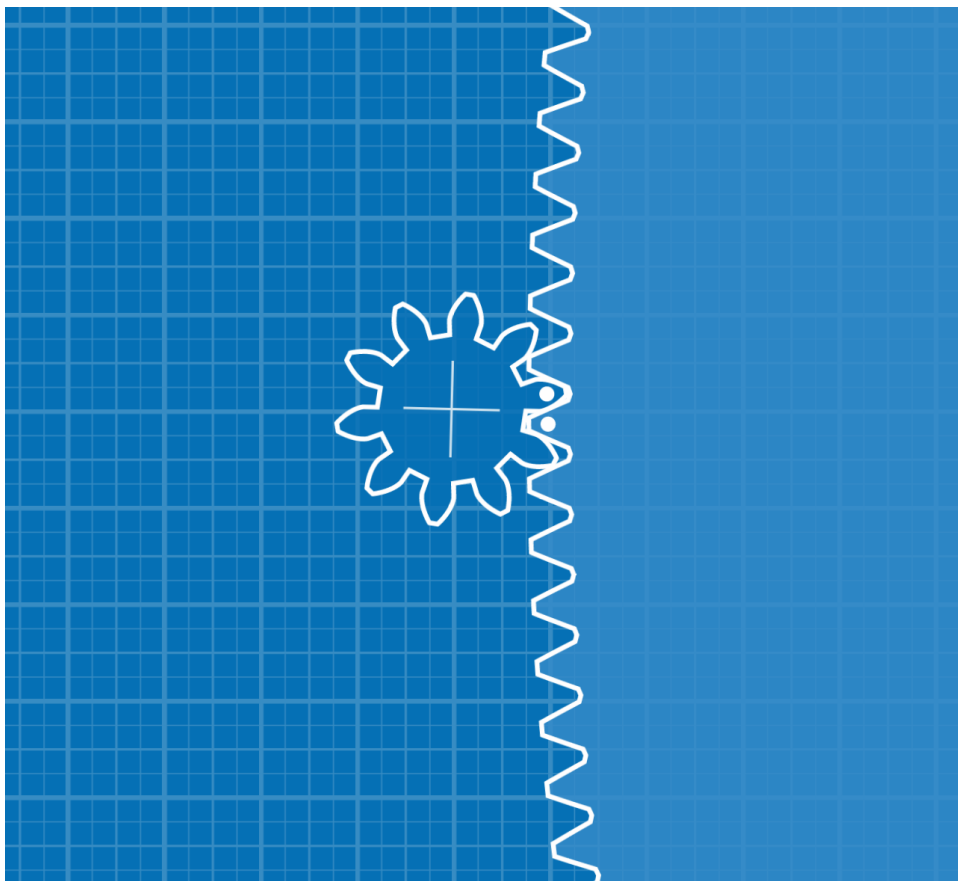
A 10 teeth gear and a 600 teeth gear for a gear ration of $\frac{1}{60}$
